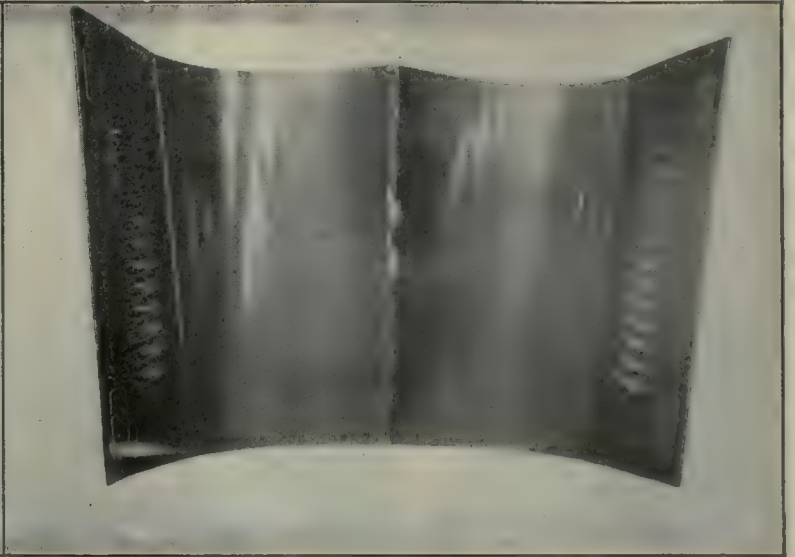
SPOT WELDING ON THE HOOD
